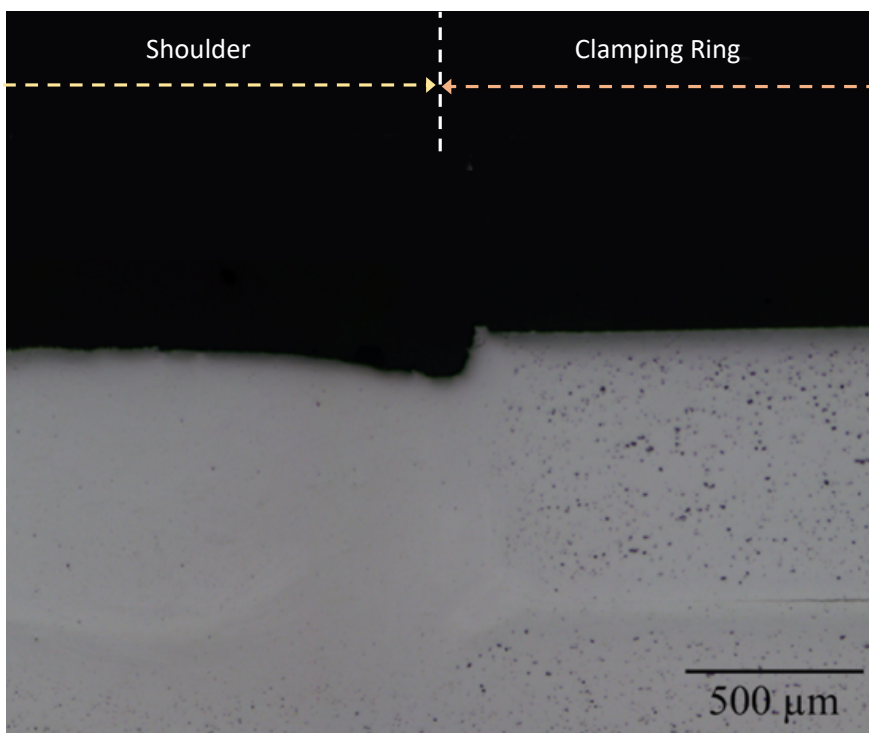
Cross section of a weld produced by the most worn tool condition (III).
